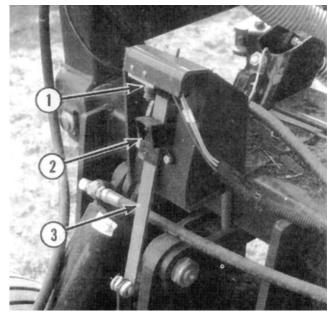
Automatic Clutch Switch Assembly: (1) Electric Switch, (2) Mechanical Activator, and (3) Sliding Bar.
